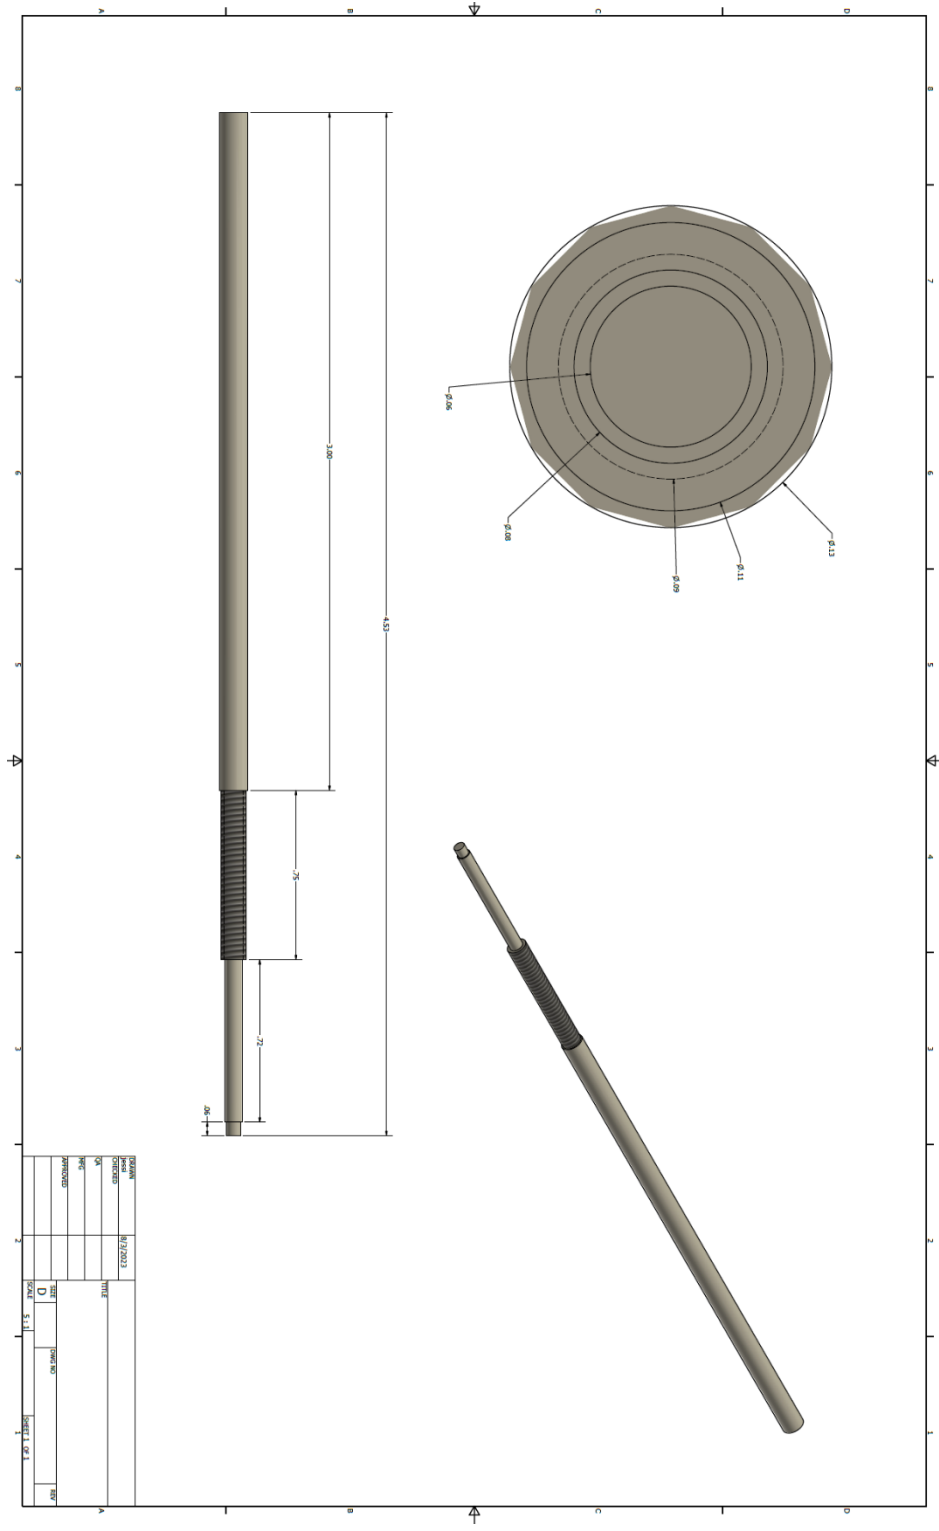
Machined homogeneity probe rod (4-40 thread).
